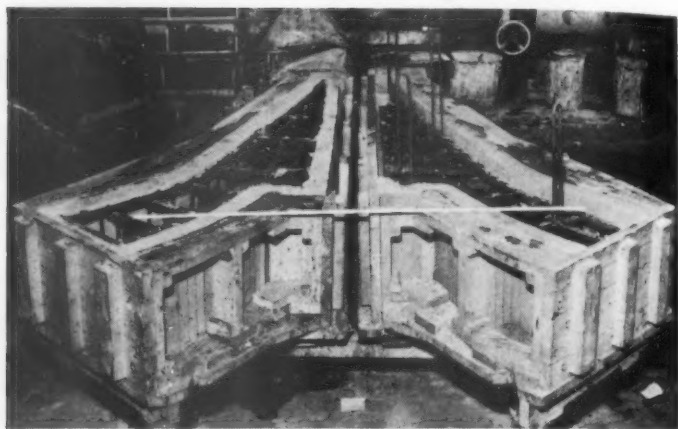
CONSTRUCTION OF LARGE HOLLOW CORE WITH ARBOR SUPPORT WHEN MADE IN HALVES.
